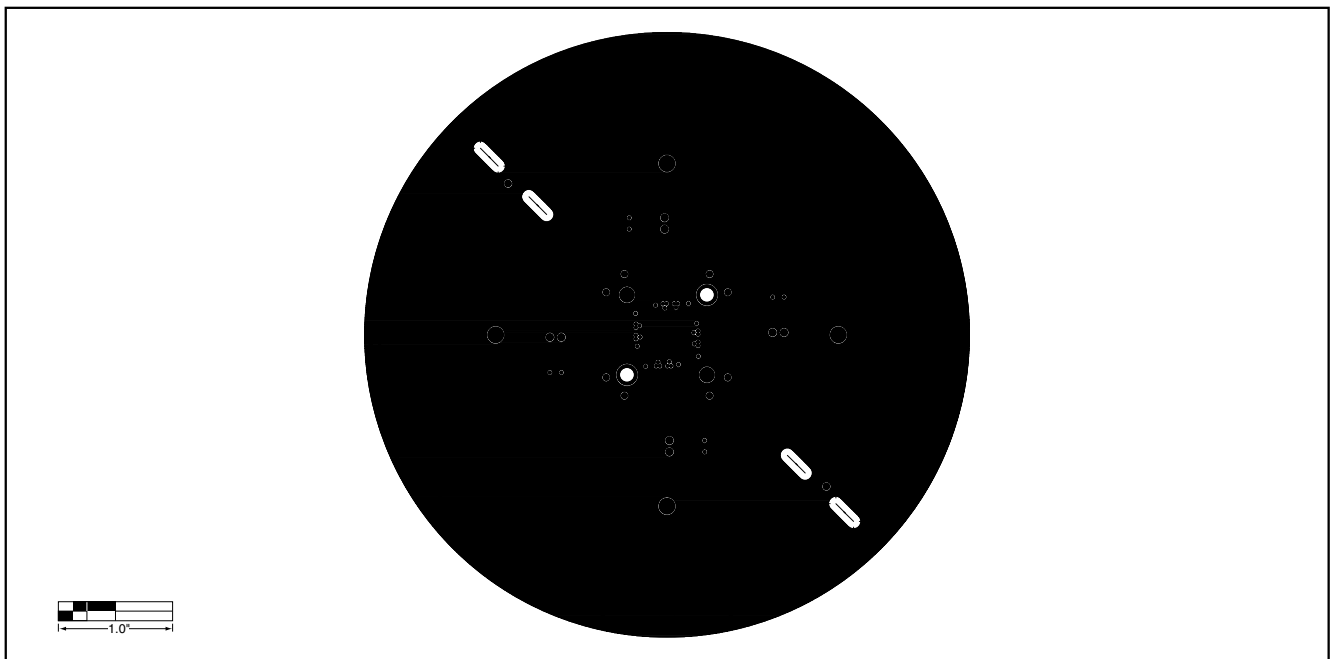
MAX3802 EV Kit PC Board Layout—Ground Plane
